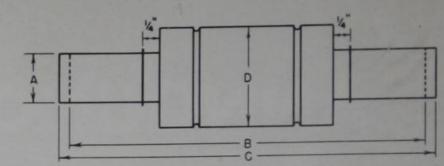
Webster Tru-Perimeter Expansion Joint-Dimension Drawing.
